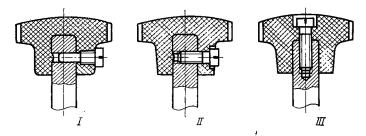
Securing handle to rod I—incorrect; II, III—correct
